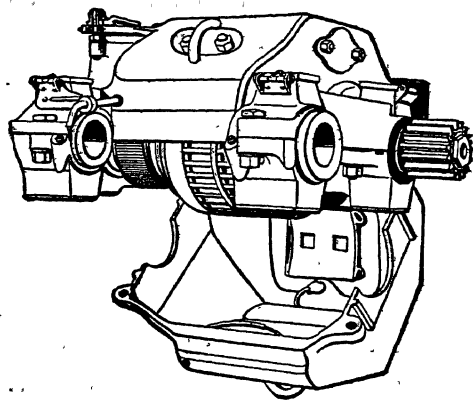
RAILWAY MOTOR (G. E. FORM).
